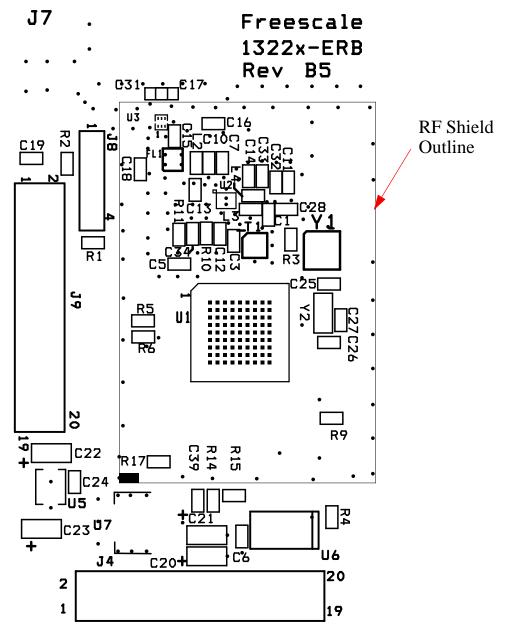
1322x Extended Range Board PCB Component Location (Top View)
